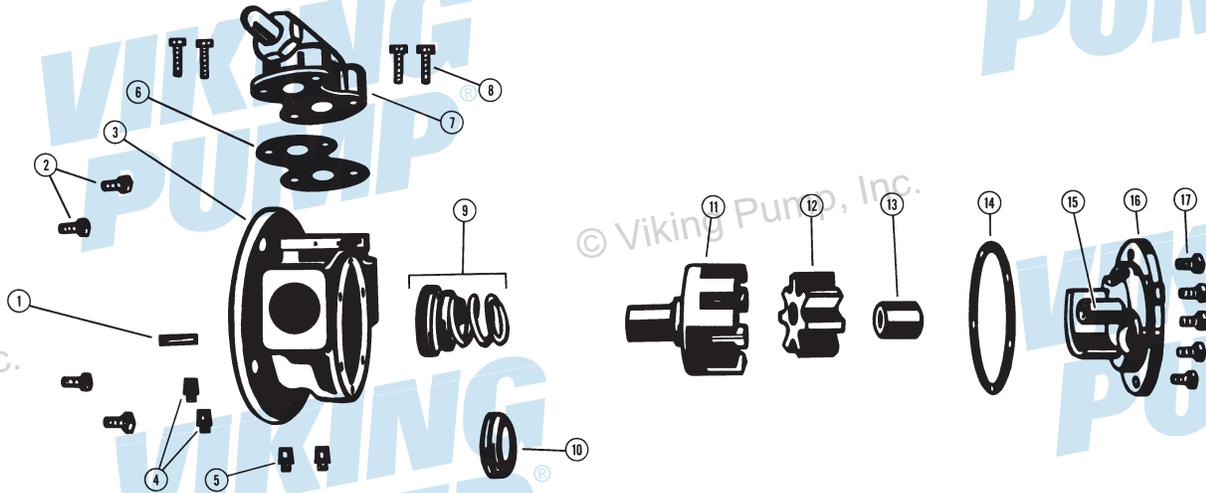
EXPLODED VIEW - 75 SERIES™ & 475 SERIES™ (G, GG SIZE)
